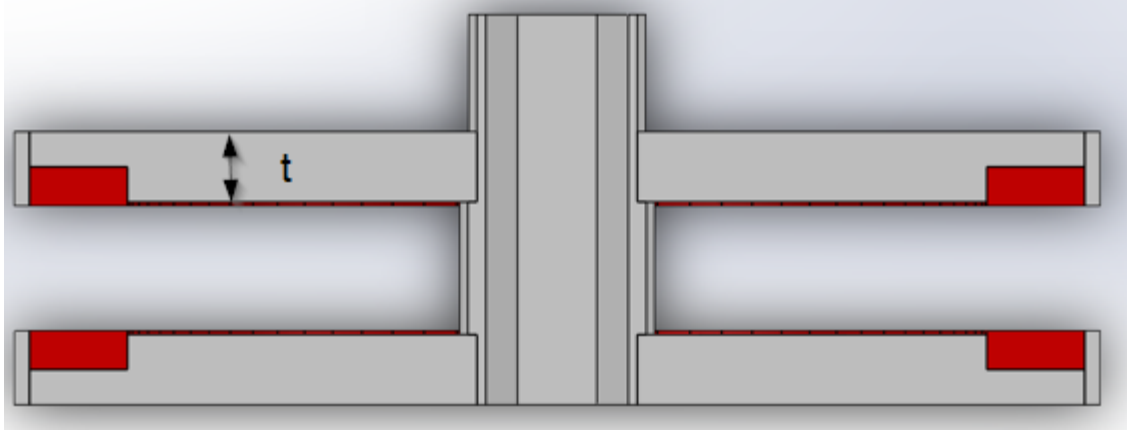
Cutout view of solid disk rotor with magnets in red.
